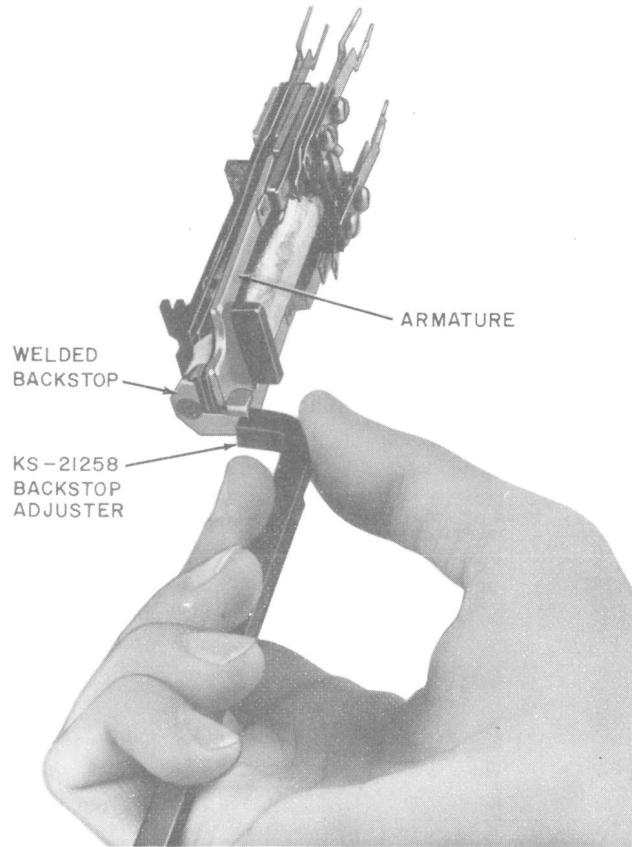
B—Relay Having 0.050-Inch Thick Welded Backstop
